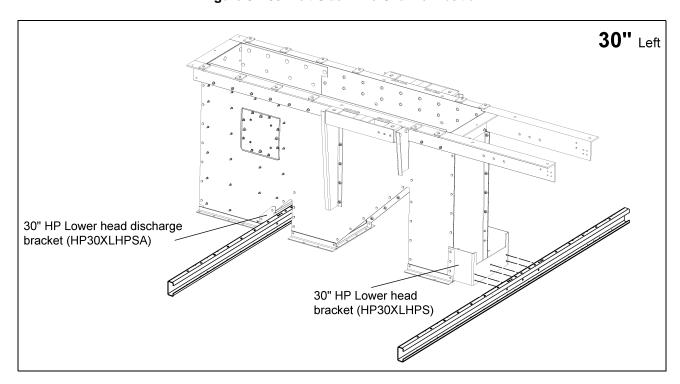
E 30" Left Drive - Cross Deck Support Channels to Lower Head Brackets
